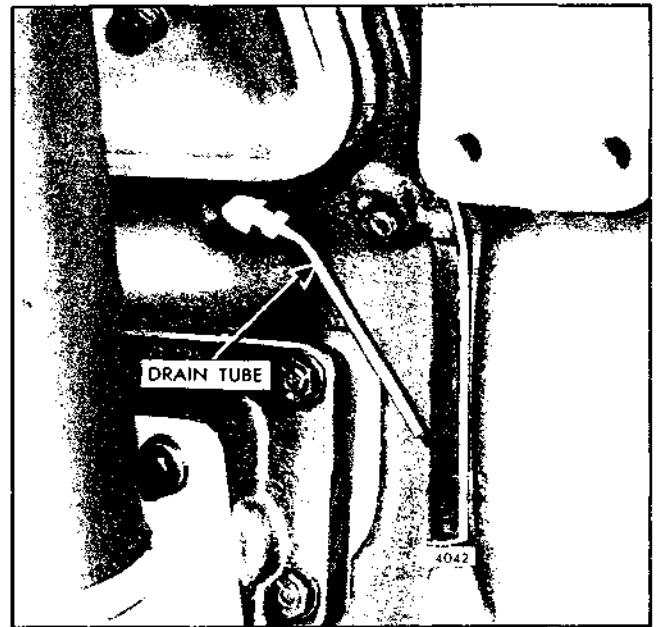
Air Box Drain Tube Mounting (6V Engine)
